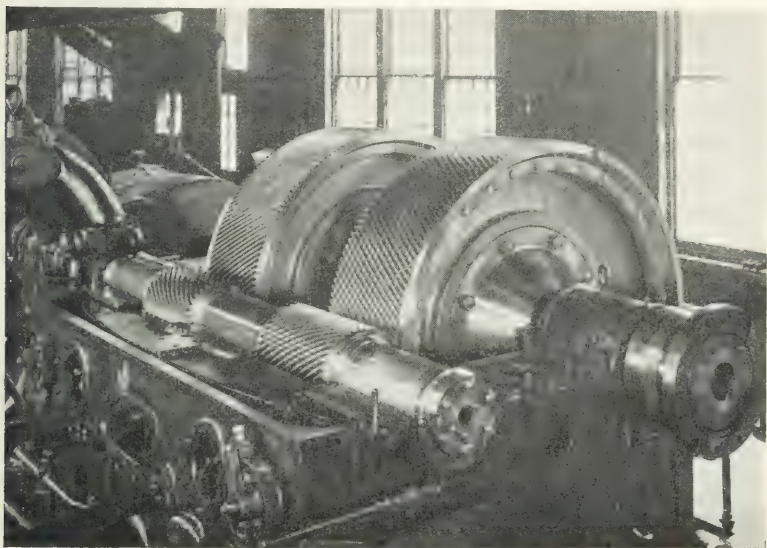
MELVILLE AND MACALPINE REDUCTION GEAR
